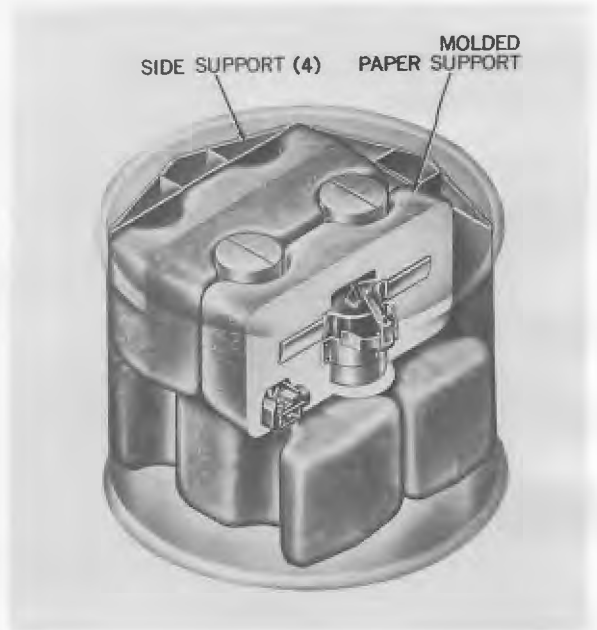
Ring Type VT Fuze Shipping Container.
